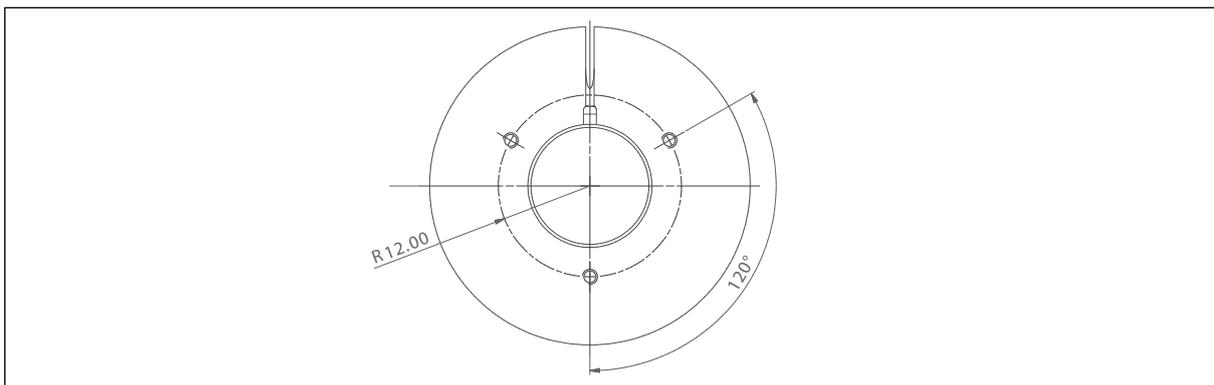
Drilling template for the GR1297 Fairing. The threads in the plate are for M2 bolts. All measures are millimeters.
